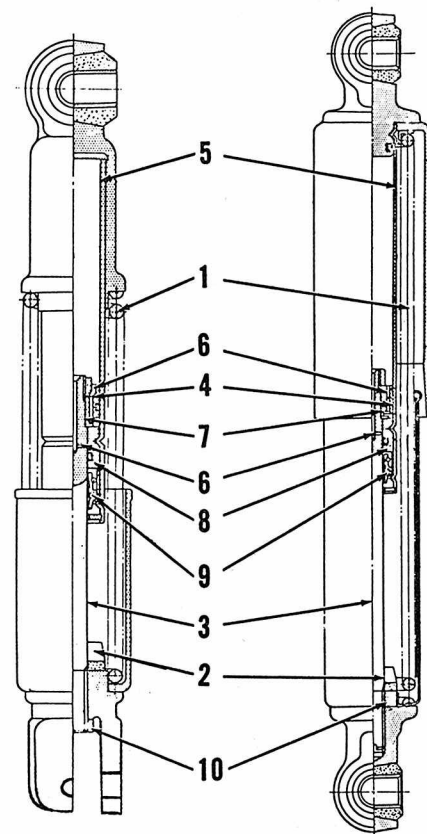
Cross sectional view of unitized suspension units. Unit on left is used on front of M15 and M31, unit on right is typical of all rear units.
